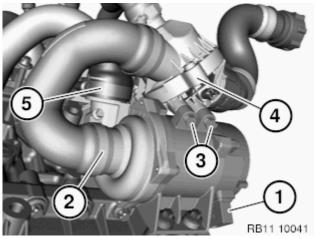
Removing Thermostat And Water Pump Connections Courtesy of BMW OF NORTH AMERICA, INC.
